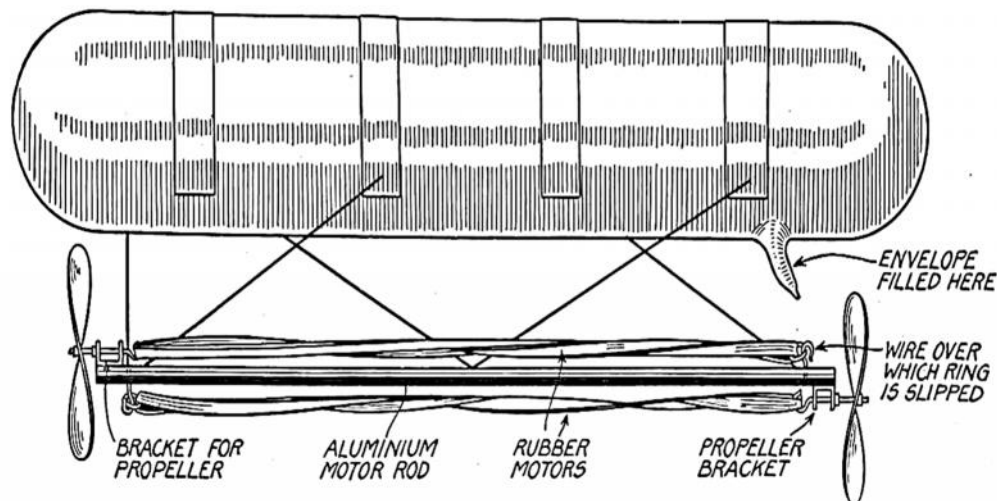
The complete dirigible showing the method of mounting the motor.
